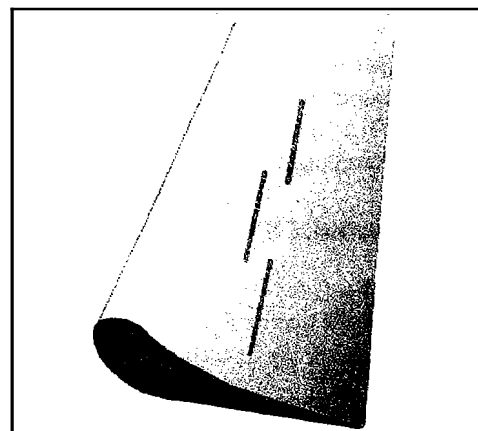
Erosion protection of last-stage rotor blades by incorporating nozzle water removal.
